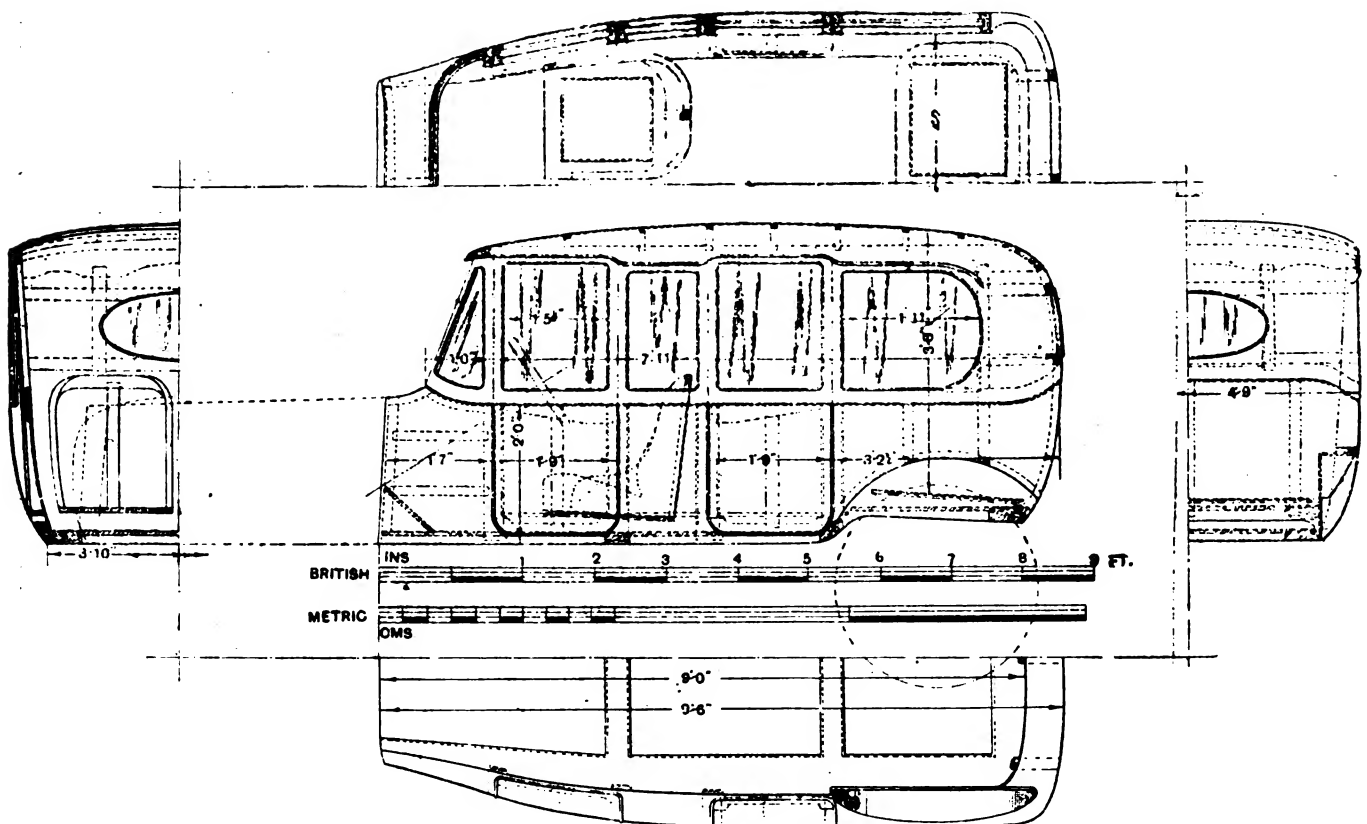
Working drawings of vee-fronted saloon or sedan body for new Lanchester chassis.
